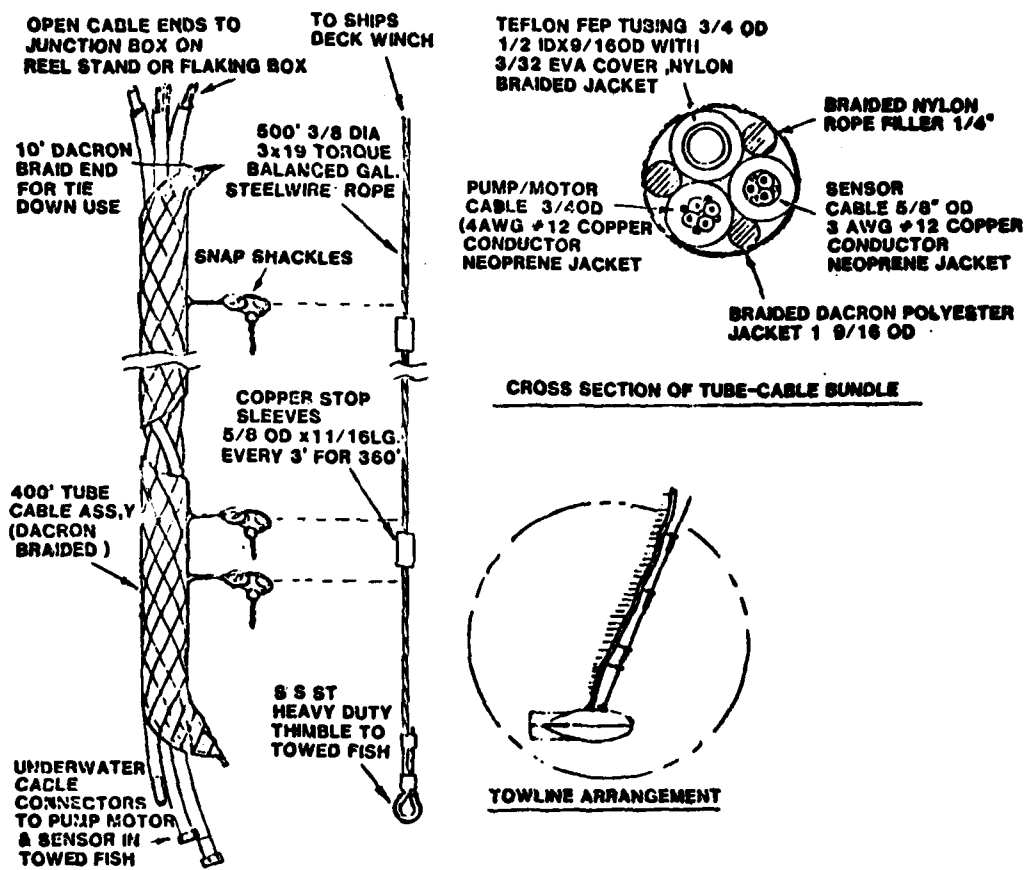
Schematic of towline-tube-cable assembly (TTCA).
